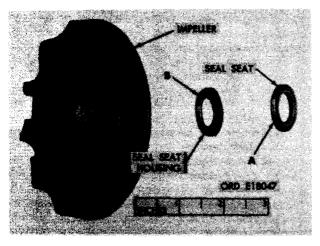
REMOVING OR INSTALLING WATER PUMP SEAL SEAT HOUSING AND SEAL SEAT.
